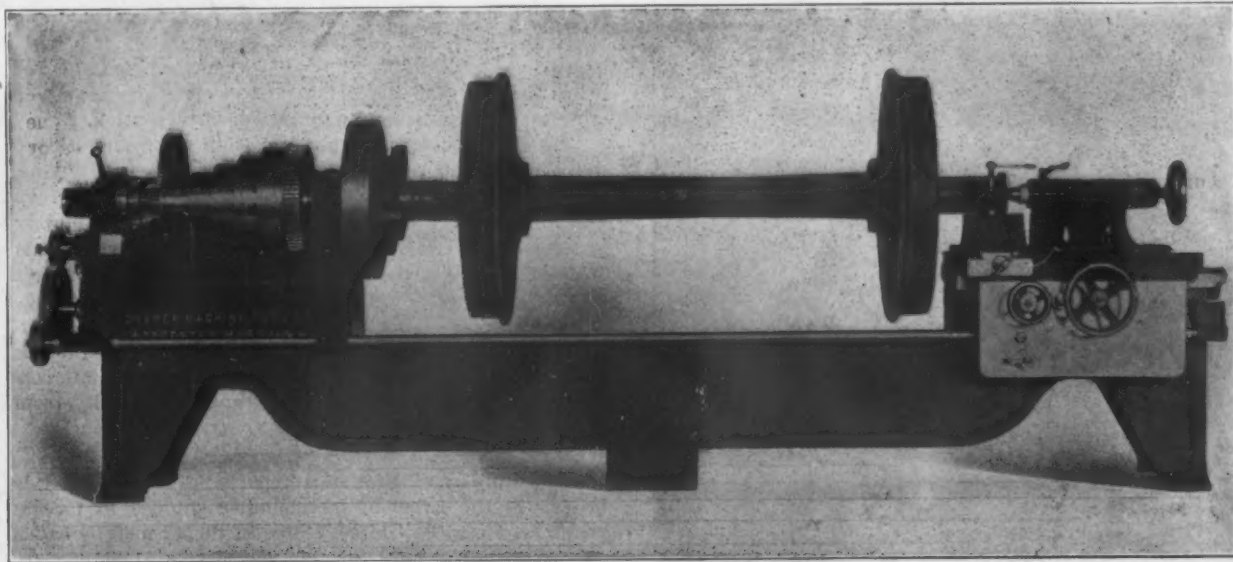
Special Draper Gap Lathe for Truing Car Wheel Axles Without Removing the Wheels.
